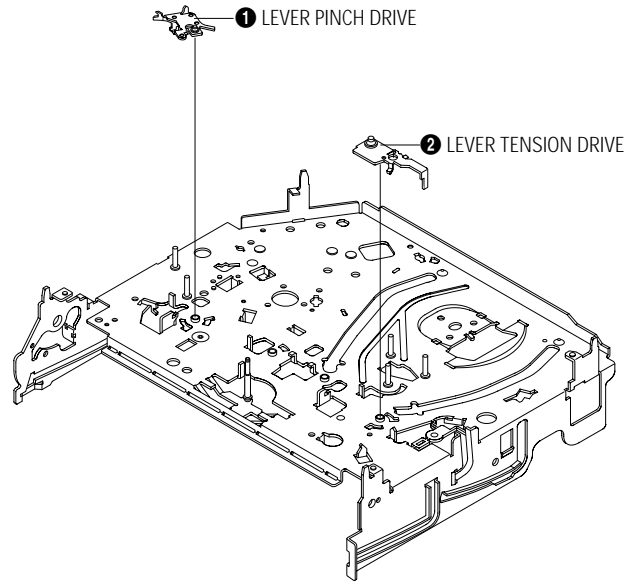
Lever Pinch Drive, Lever Tension Drive Removal
